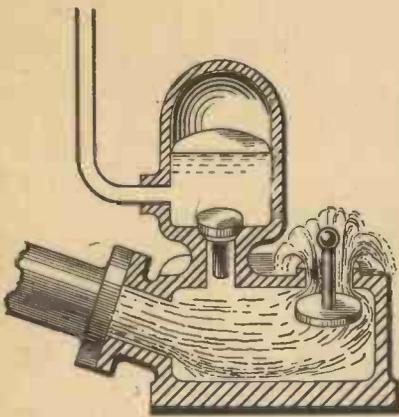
A section of a hydraulic ram showing part of the "drive" pipe and "dash" valve open.
